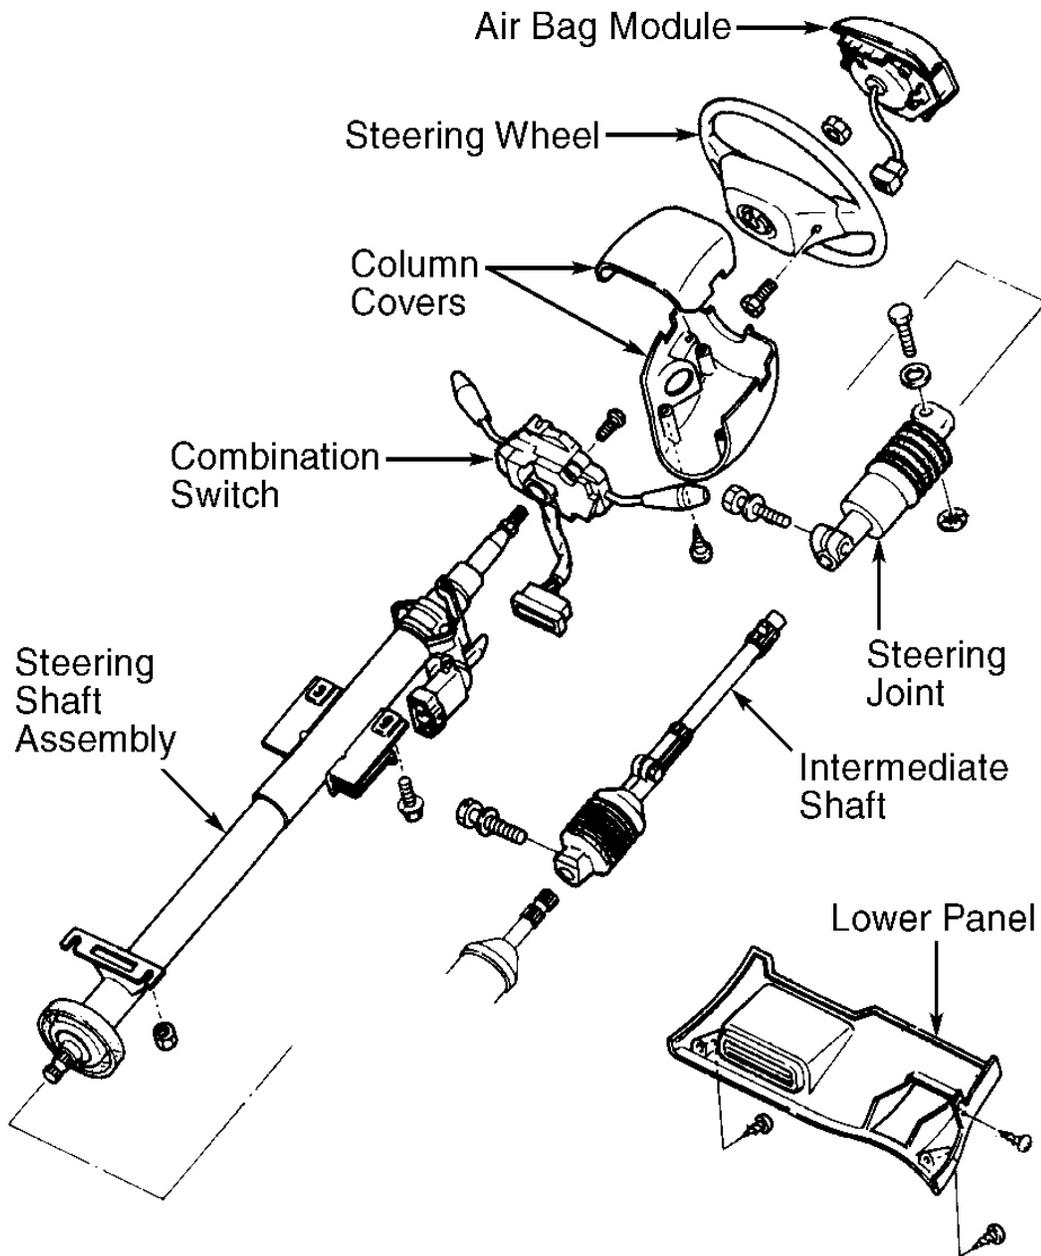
Exploded View Of Steering Column (MX-6 & 626)
